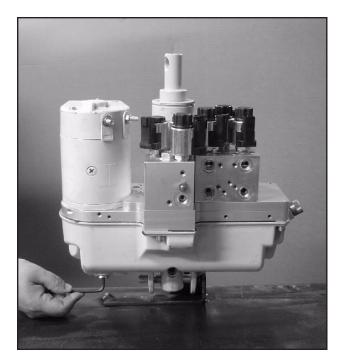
Remove Drain Plug using a 8mm allen wrench and drain all the hydraulic fluid from the Base Tank.
